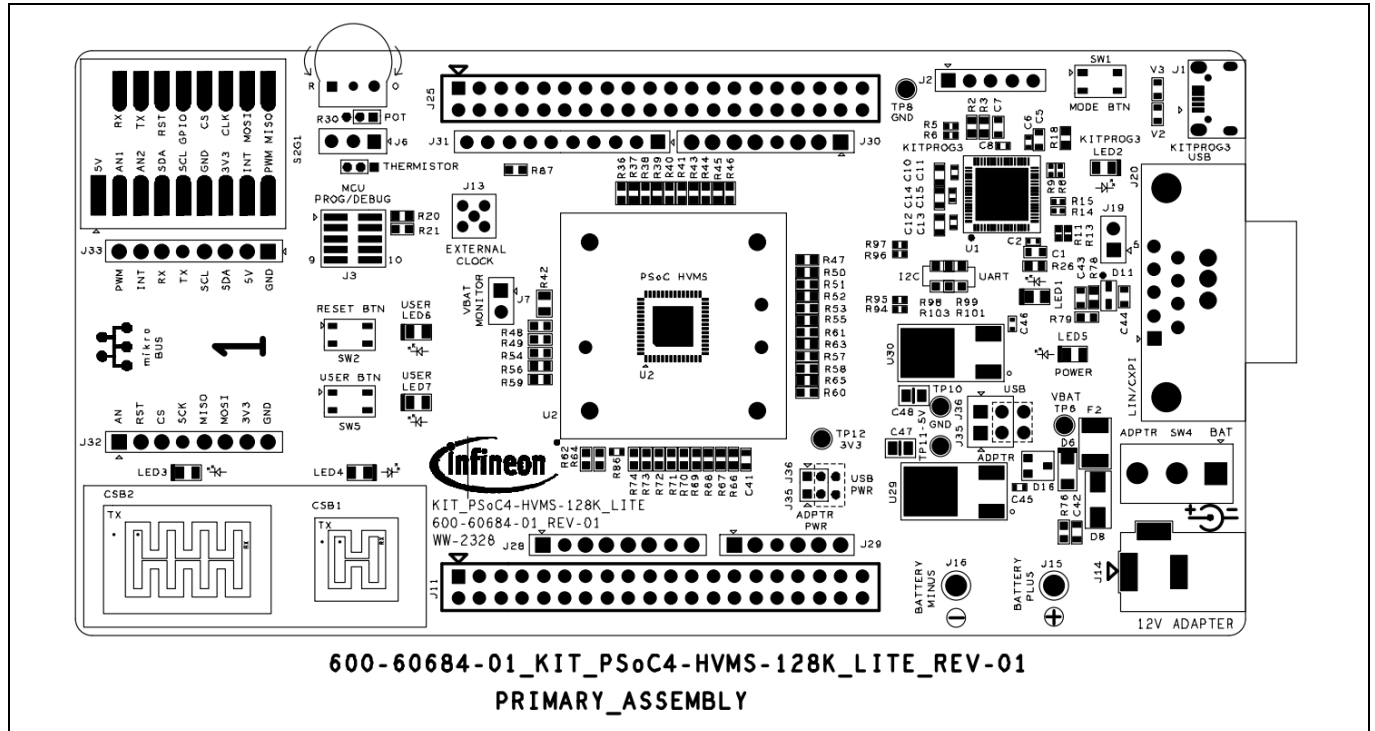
KIT\_PSoC4-HVMS-128K\_LITE kit assembly drawing - top view
